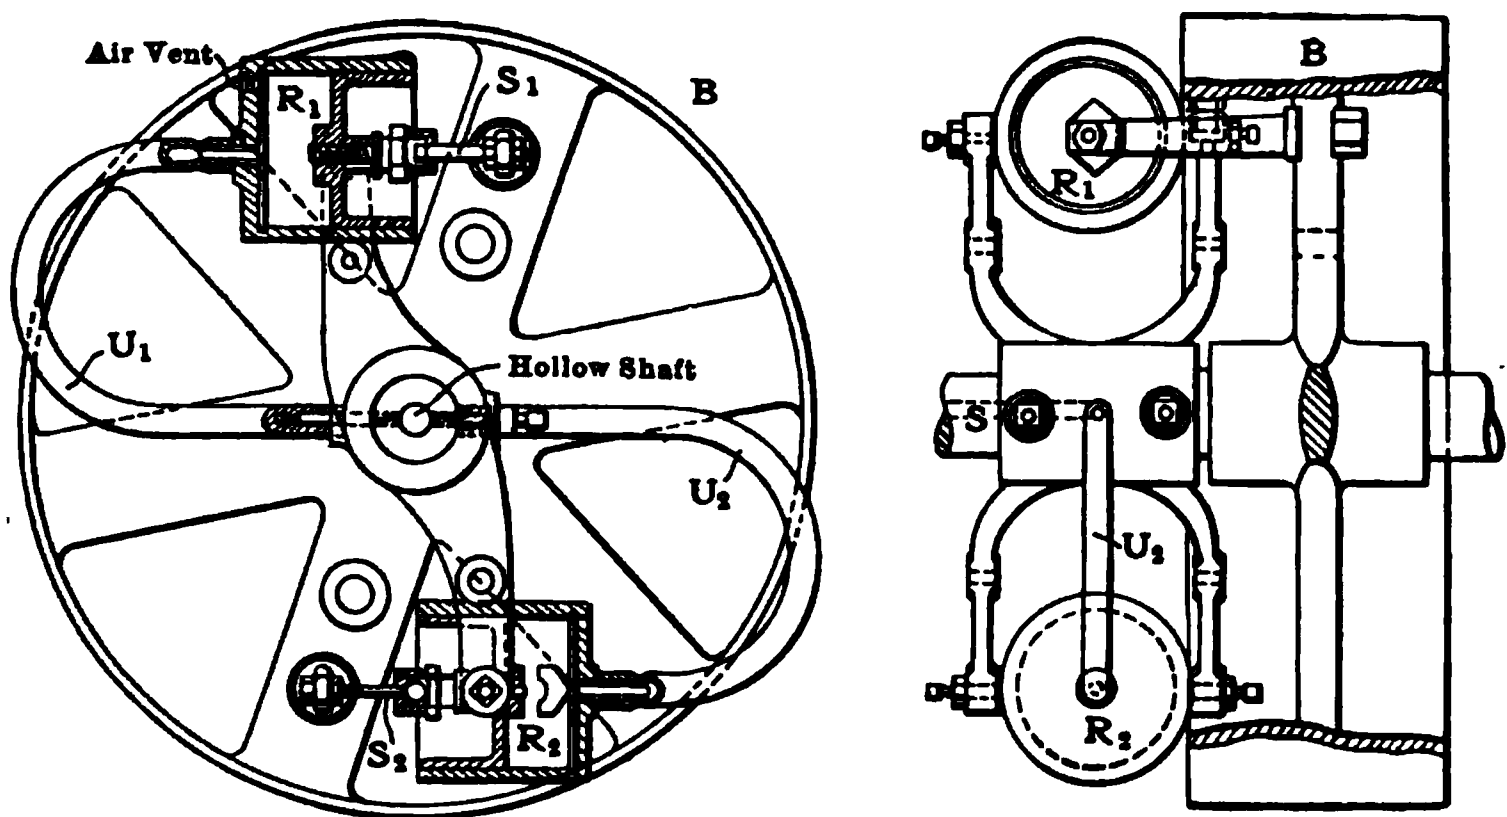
Details of Pistons and Cylinders in Flather's Dynamometer.
